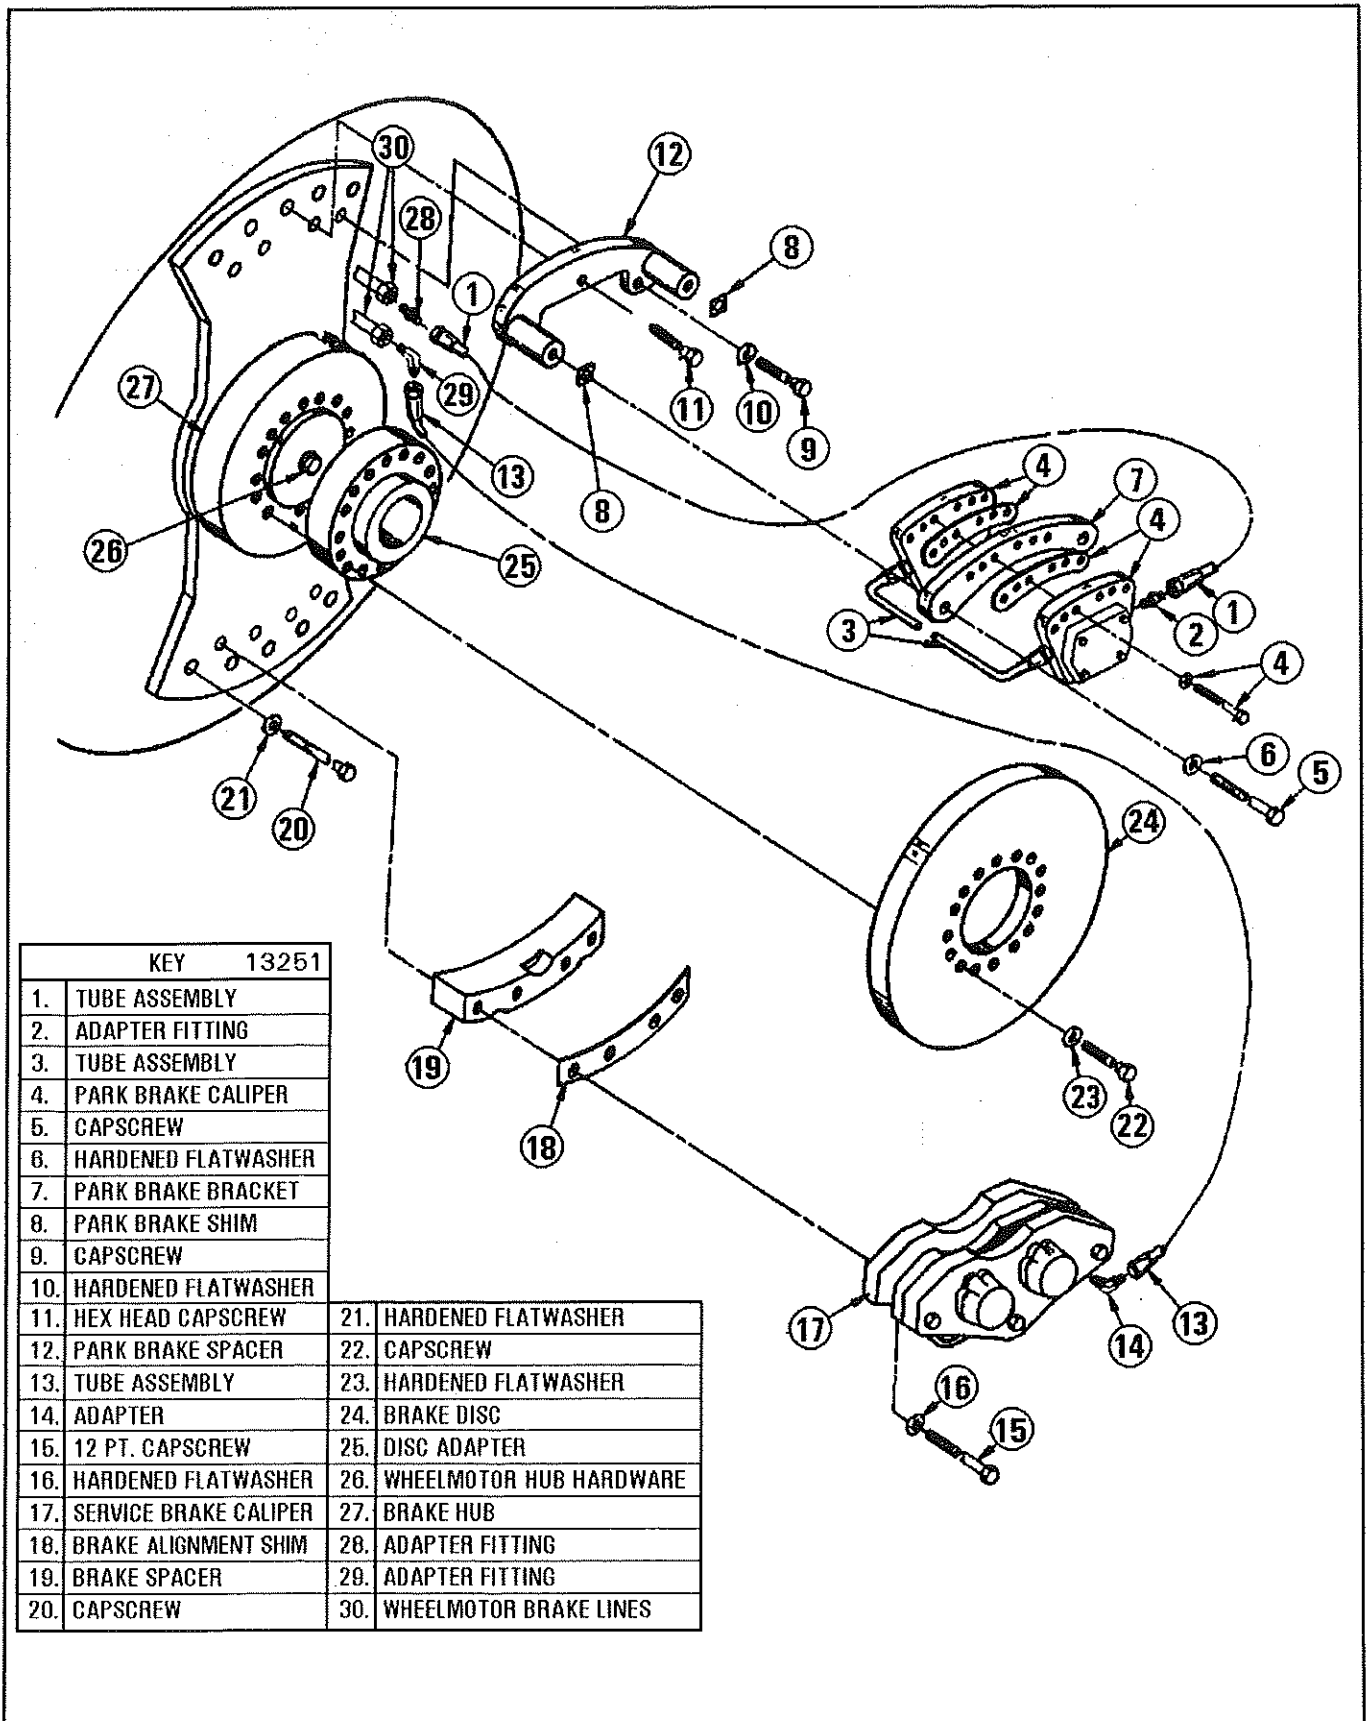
SINGLE DISC REAR BRAKE ASSEMBLY WITH PARK BRAKE (13251)
